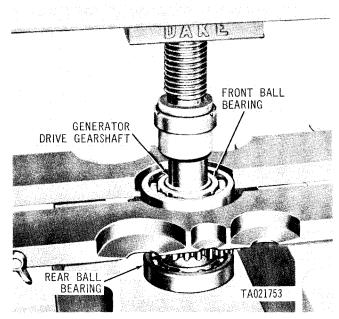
Pressing generatordrive gearshaft from ball bearing, model AVDS-1790-2D and AVDS-1790-2DR engines.
